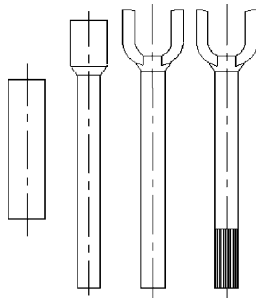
Schematic illustration of precision cold forging for steering yoke.
